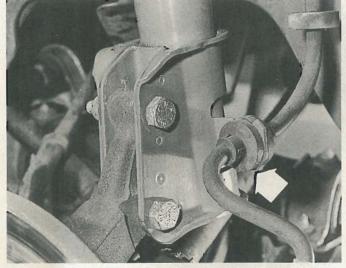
Unscrewing the suspension strut-to-suspension turret bolts (Sec 6)
